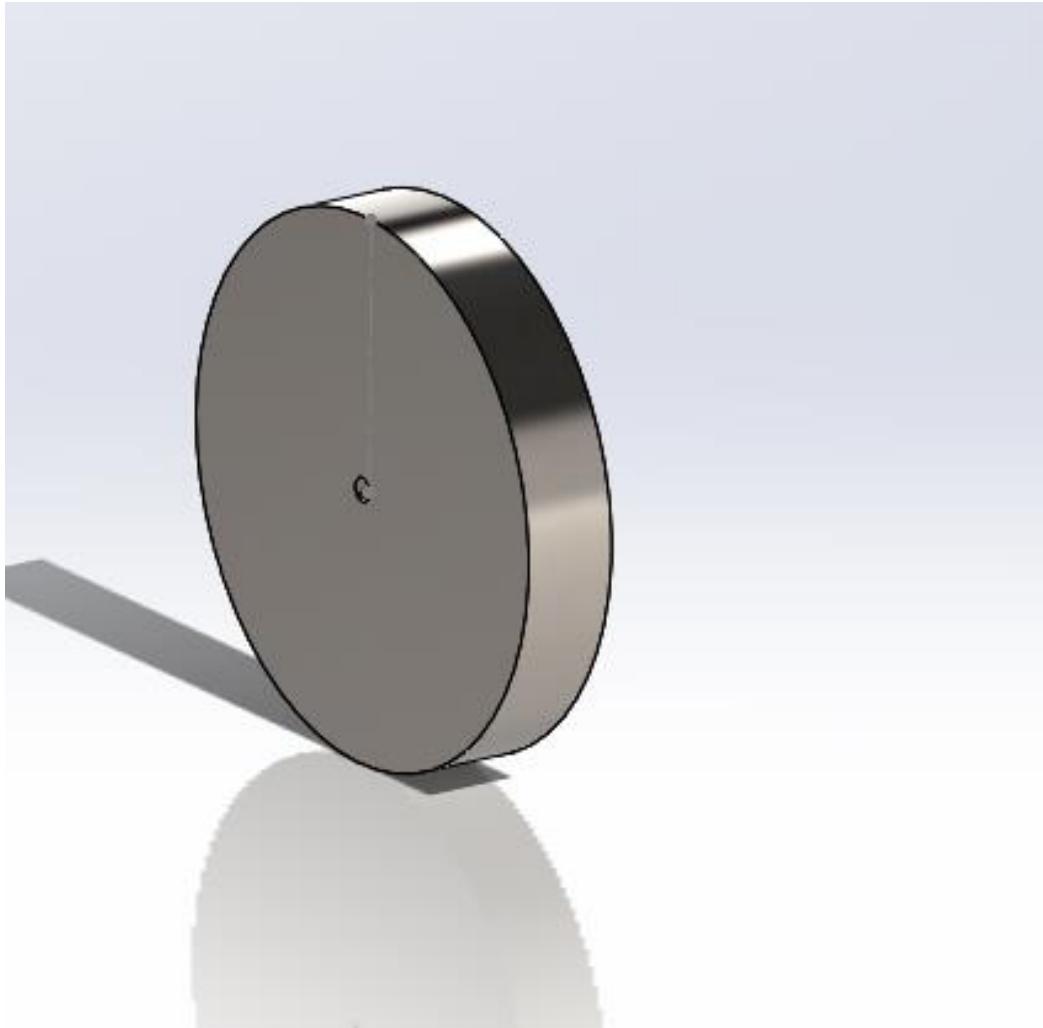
Part 1028 (Low-Carbon Steel Disc) CAD Drawing
